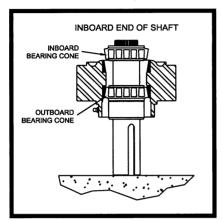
Placing Inboard Bearing Cone onto Shaft
